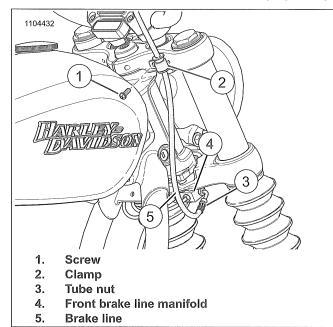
Brake Line: Front Master Cylinder (ABS) BRAKE LINE: FRONT CALIPER (ABS)
